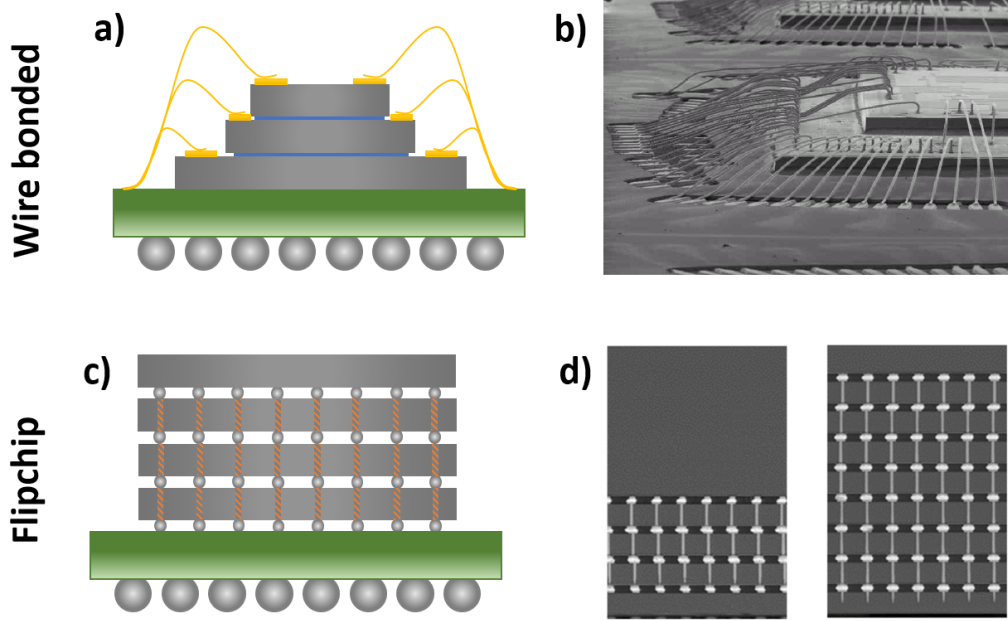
3D packages achieved with: a) wire bonding and c) flip chip and TSVs. Examples of the two different 3D packages: b) wire bonded 3D SiP and d) 4 and 8 layered DRAM packaged through flip chip. Adapted from [27] and [28].
